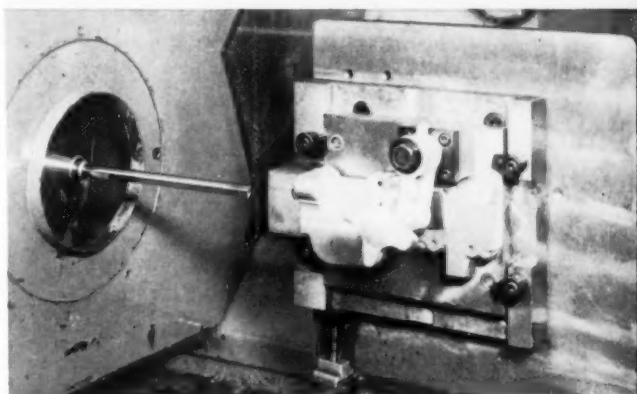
Drilling setup for producing a hole in an aluminum casting with a two-flute center-cut gun drill. The hole is $3\frac{3}{4}$ inches deep.
